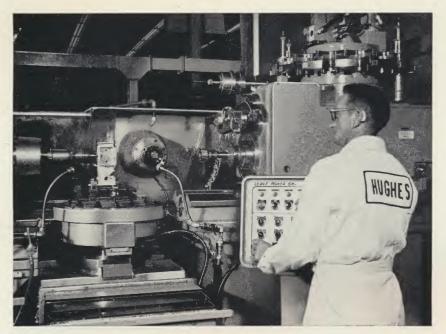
Close-up view of work area of MT-3 numerically controlled machining center. Part on rotary indexing table is being machined by tool in the universal spindle head at right. Tape program includes operations by heavy-duty milling head at rear and precision boring head at left.
